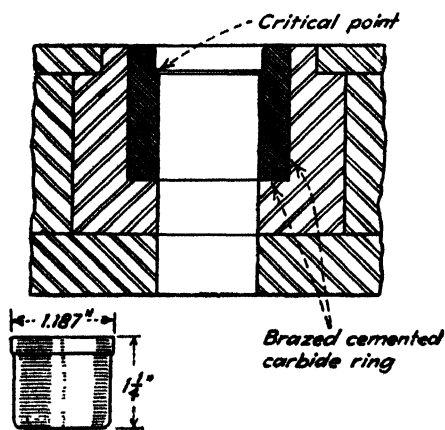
Combination draw and form die with carbide draw ring, for refrigerator muffler. As many as 700,000 parts made between repolishing operations as against 60,000 parts with high-carbon, high-chrome tool-steel inserts, between dressings.
